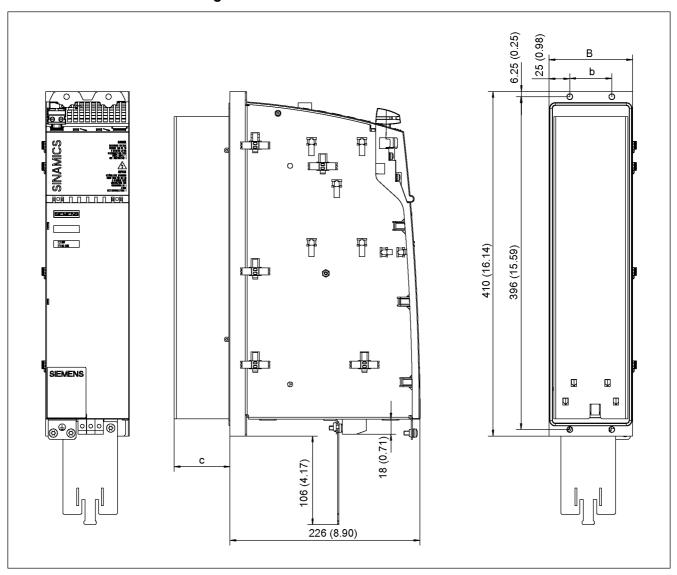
Dimension drawing of Active Line Module with external air cooling (16 kW)
